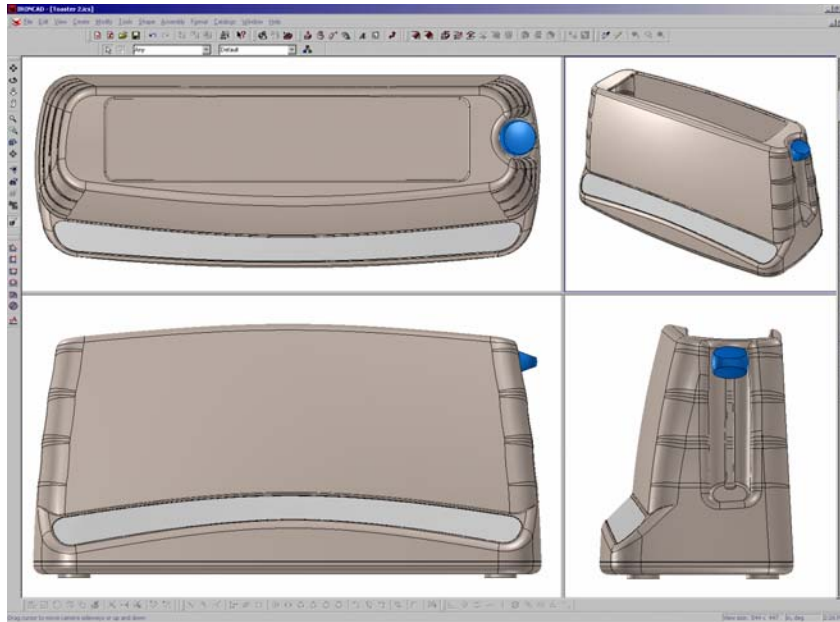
Final Toaster Assembly Orthographic and Perspective Views
